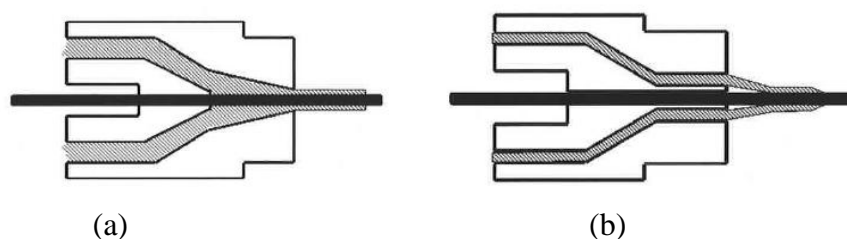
Sketch of wire coating dies: (a) Pressure tooling die and (b) Tube-tooling die in ref.[15]
